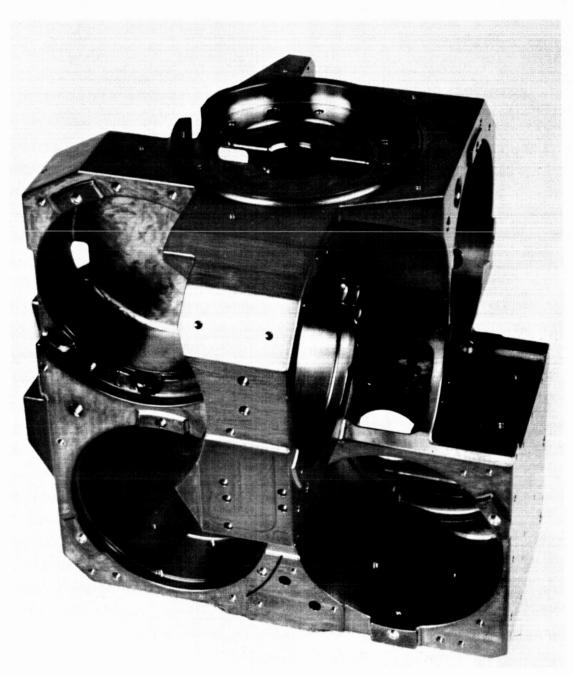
INNER GIMBAL AFTER FINAL MACHINING
